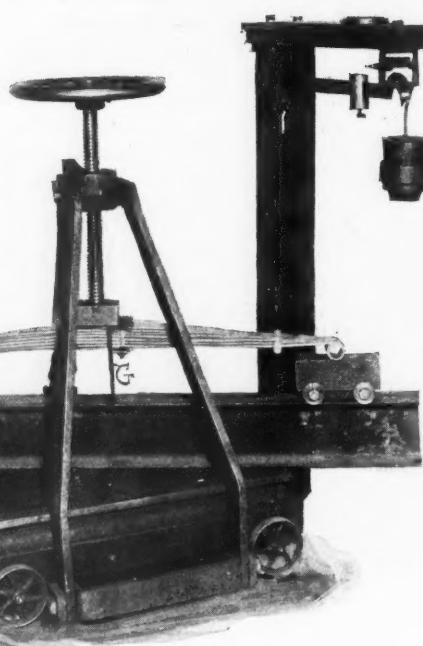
Scale arrangement showing how every spring used on the Marmon car is tested before being fitted in the chassis
